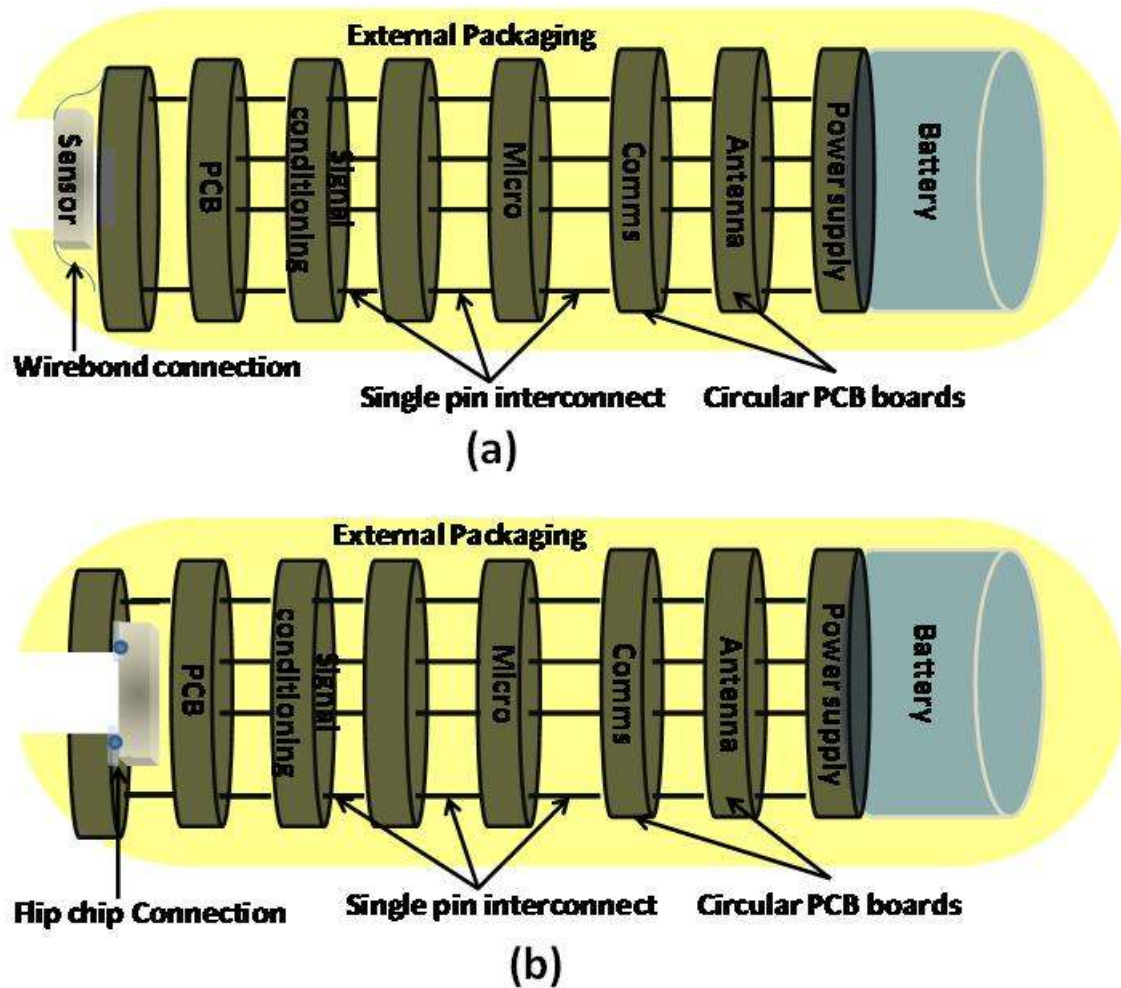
Schematic of packaging solution II: (a) wire bonded and (b) Flip chip version.
